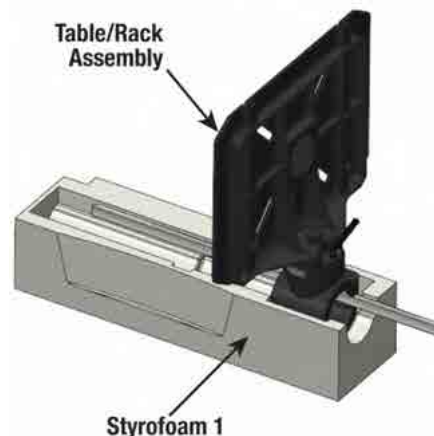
Table/Rack Assembly in Styrofoam 1
